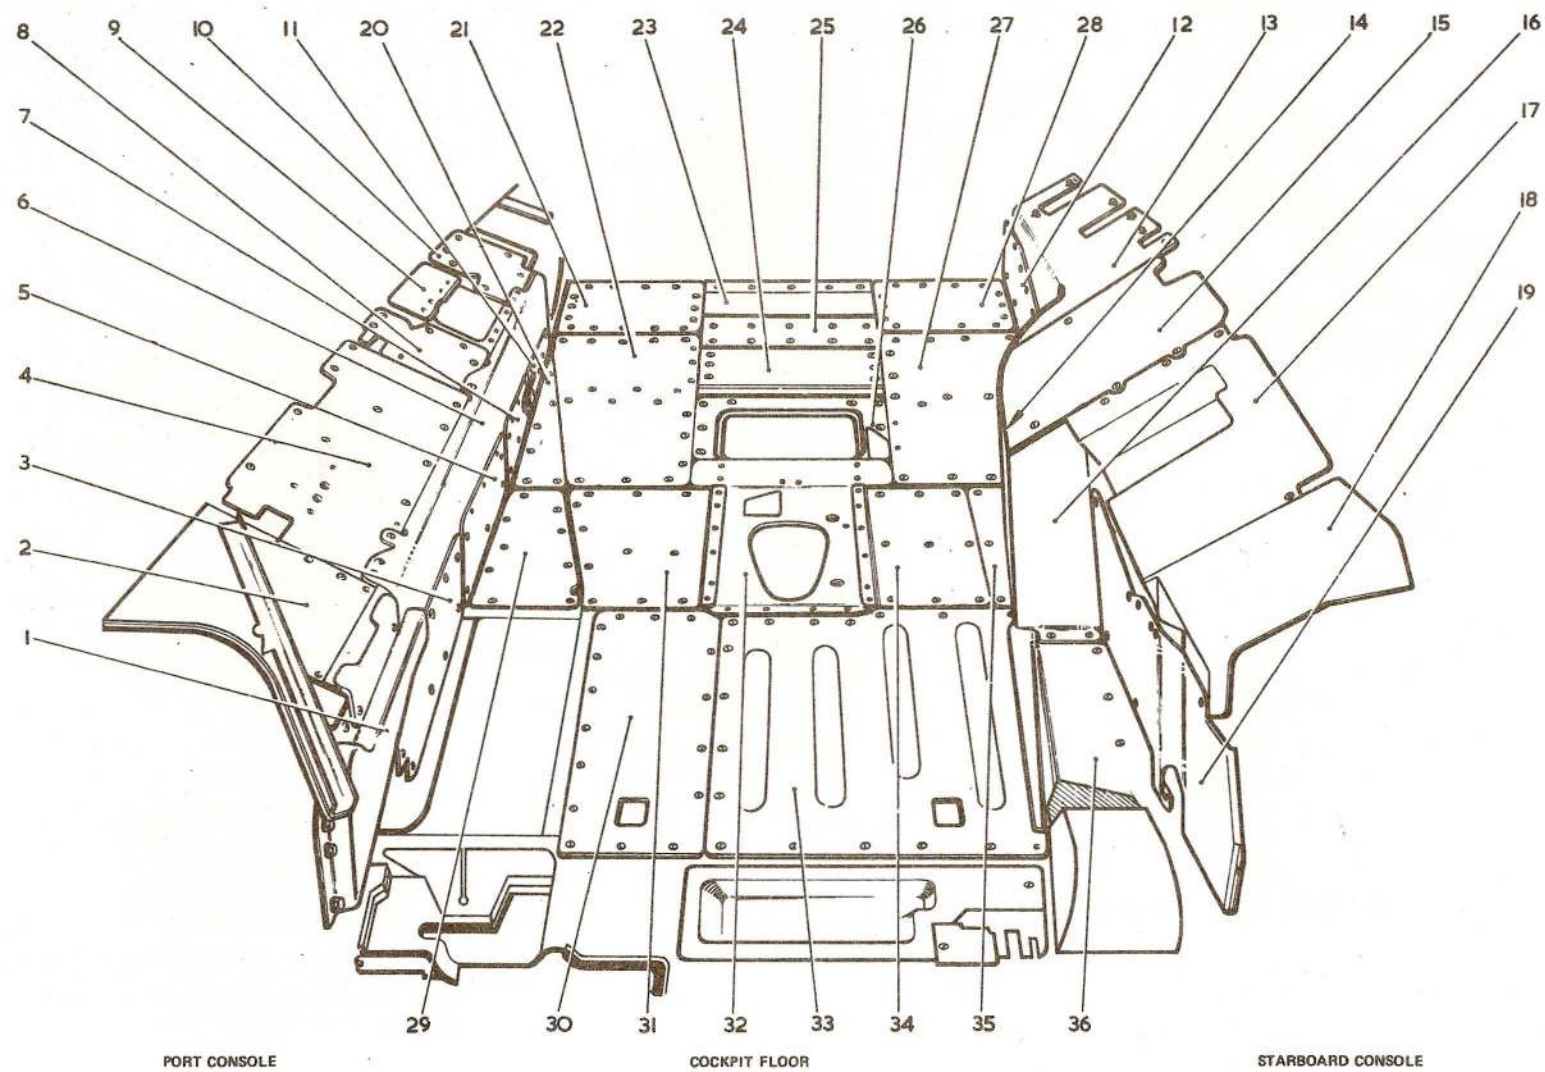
ACCESS PANELS IN COCKPIT CONSOLES AND FLOOR
